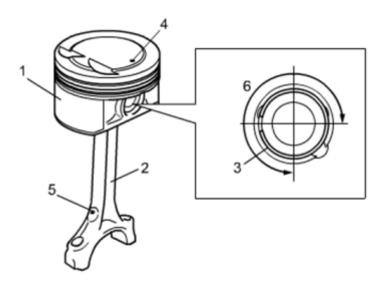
Inserting Piston Pin To Piston And Connecting Rod Courtesy of SUZUKI OF AMERICA CORP.
